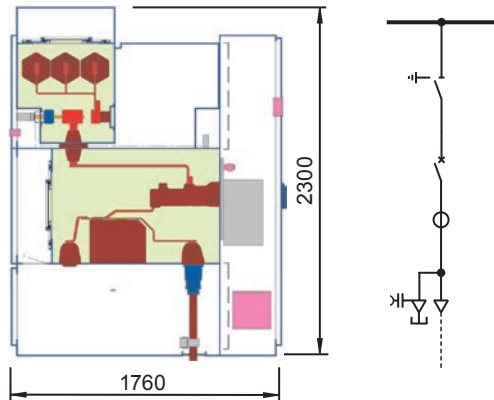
Feeder panel 800 A with block-type transformer or sensor and one cable per phase
